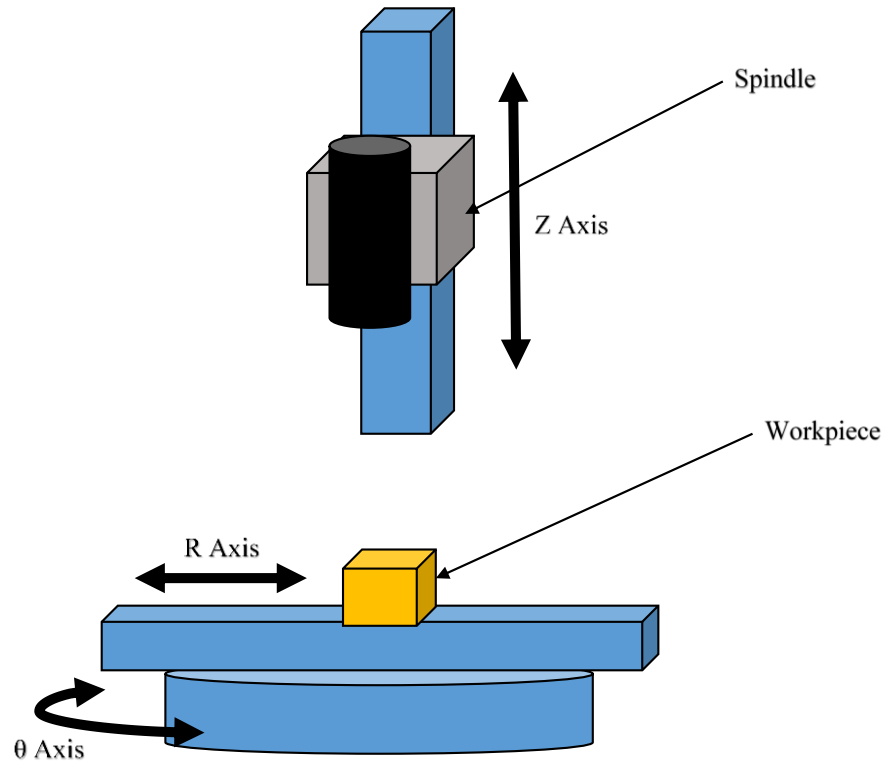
Cylindrical kinematic arrangement for a micromilling machine
